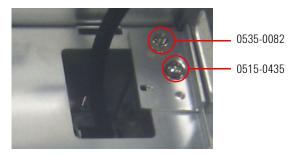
Uninstall the L-bracket from the rear mounting deck
